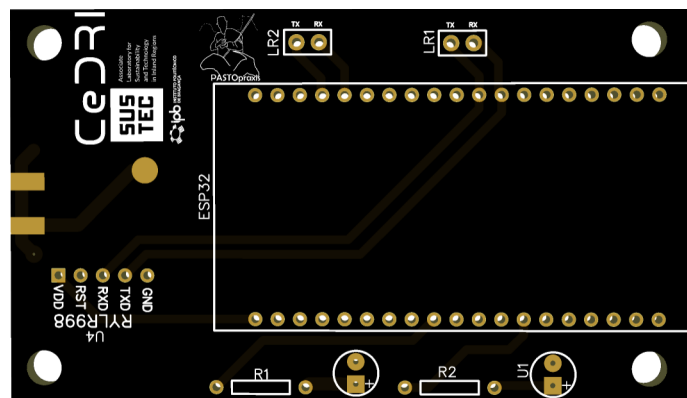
Gateway PCB. In this image the pins and other details of the PCB in better detail.
